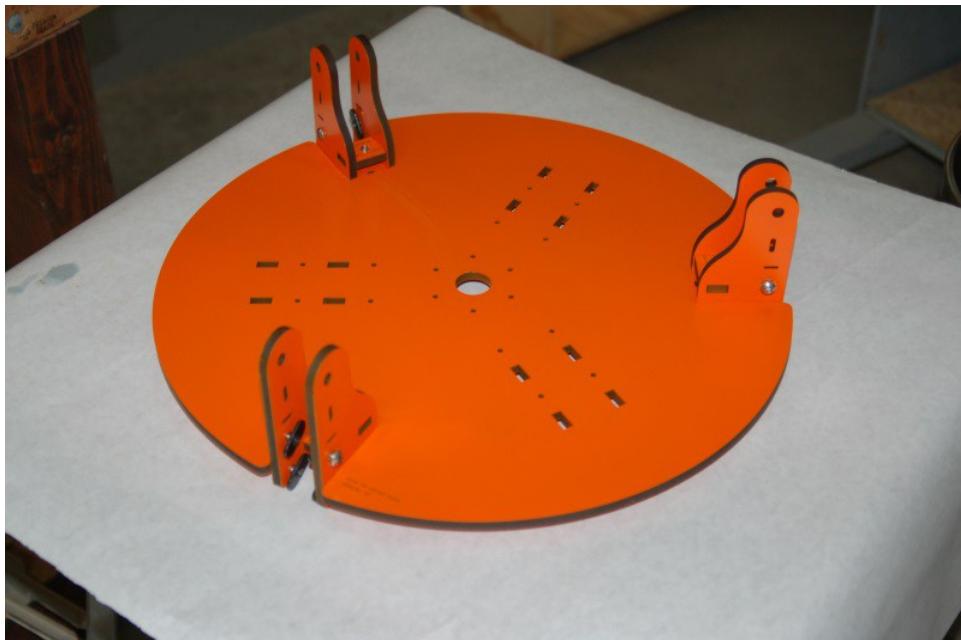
Assembled Idler Brackets and Top Support Plate.
